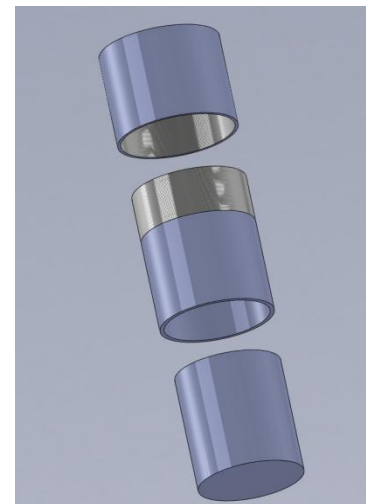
SolidWorks drawing of Flat Spring and Sheath
